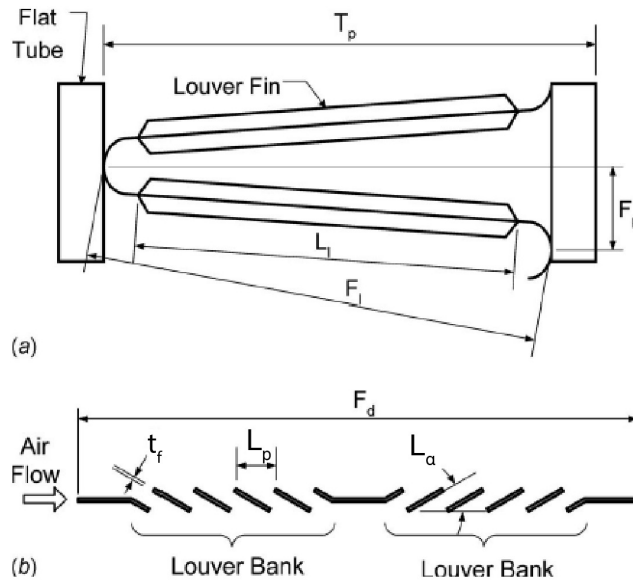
Schematic of a flat-tube louver-fin heat exchanger: (a) close-up frontal view; (b) cross-sectional view of louver fin. Adapted from Park and Jacobi [2009]
